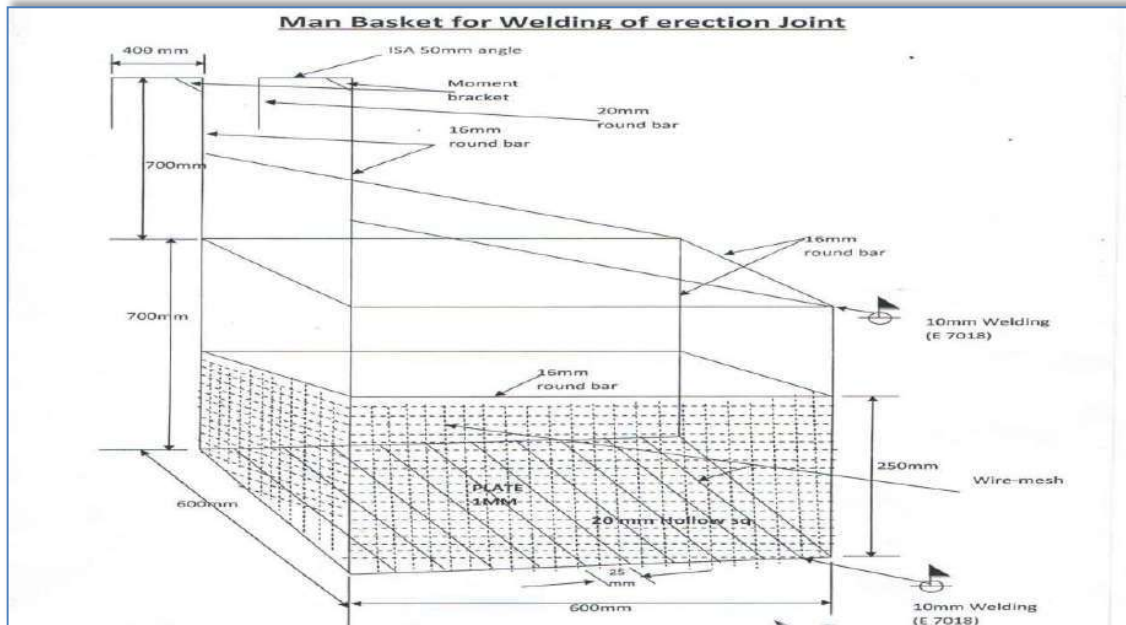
Man Basket for Welding Erection Joint
